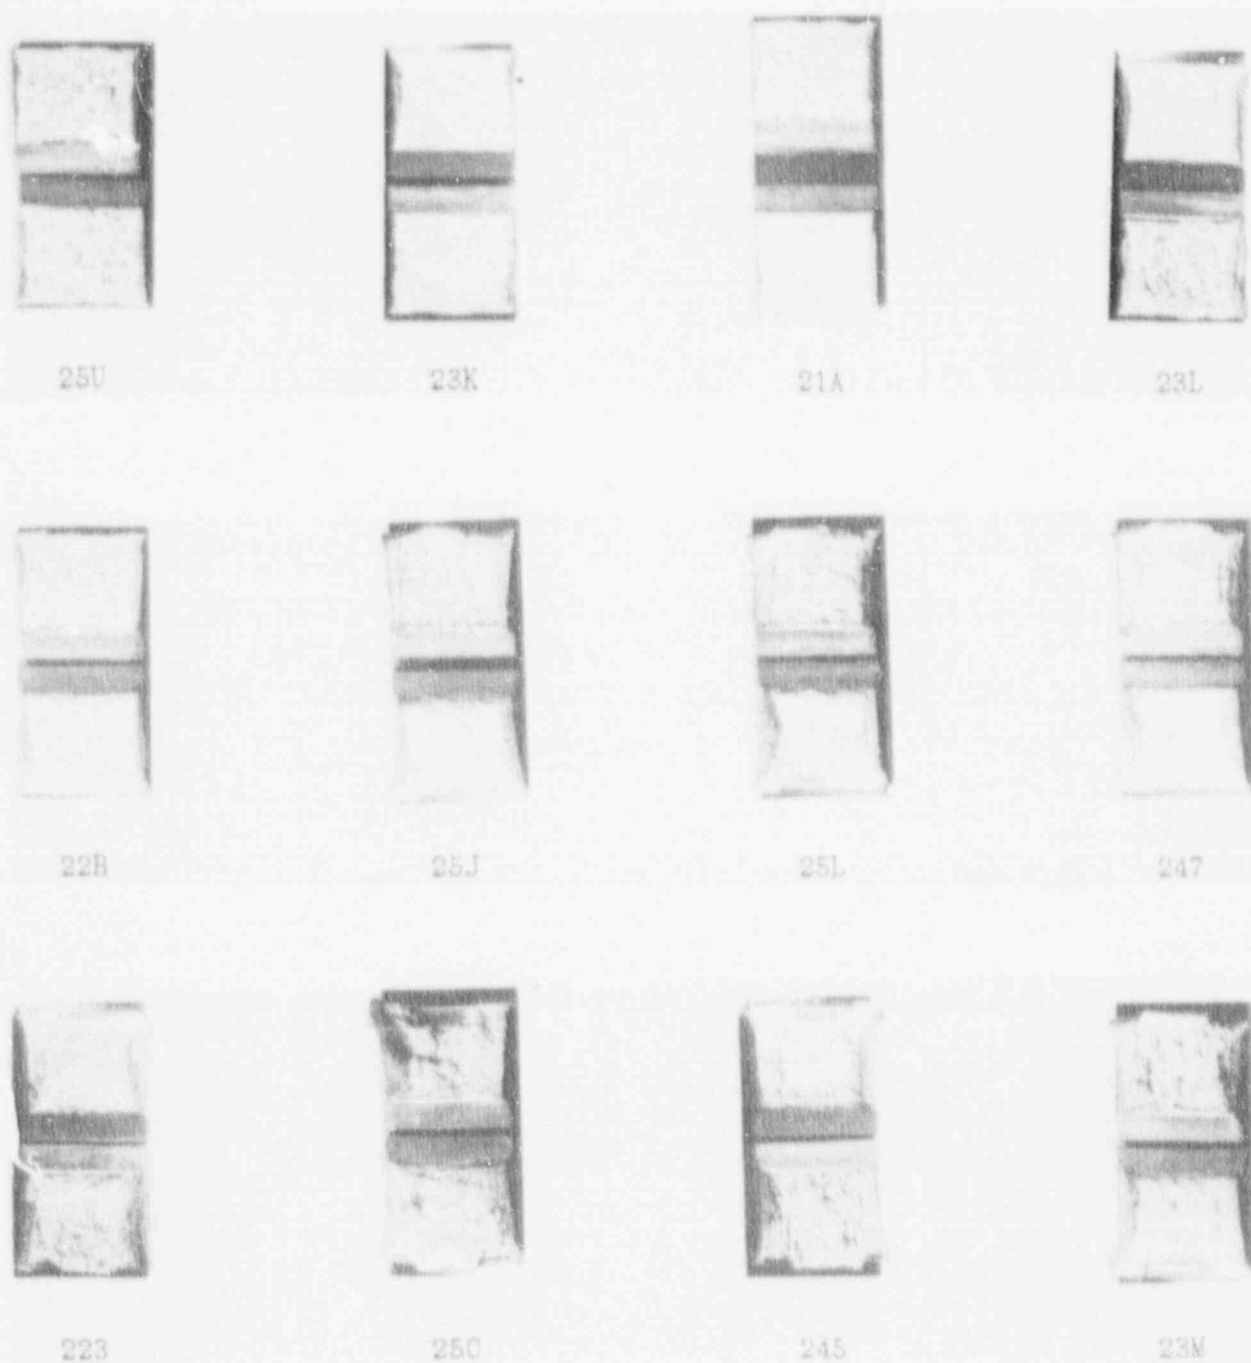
Charpy V-Notch Impact Specimen Fracture Surfaces for the San Onofre Unit 3 Reactor Vessel Intermediate Shell Plate C-6802-1 (Transverse Orientation)
